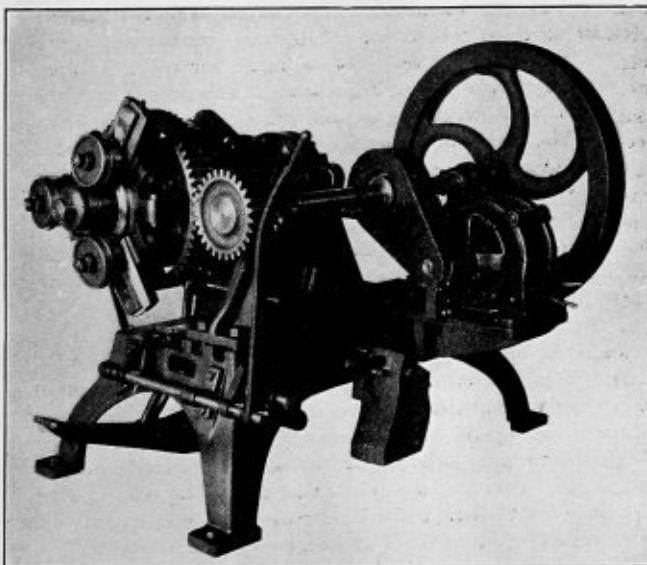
HARTZ MOTOR-DRIVEN WELDER WITH GEAR GUARD REMOVED
